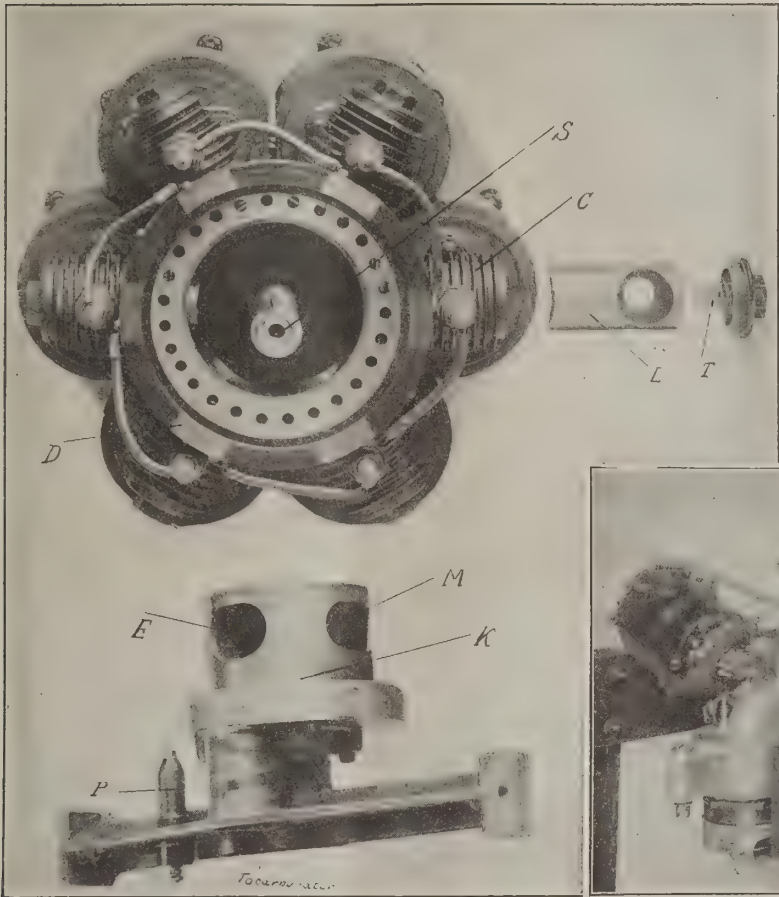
Distributing Device of the Trebert Engine. S, shaft; C, combustion chamber; L, sleeve fitting within C and held by spring T against the casting K; E, intake port; M, exhaust port; P, magneto contact, rubbing against distributor D.
